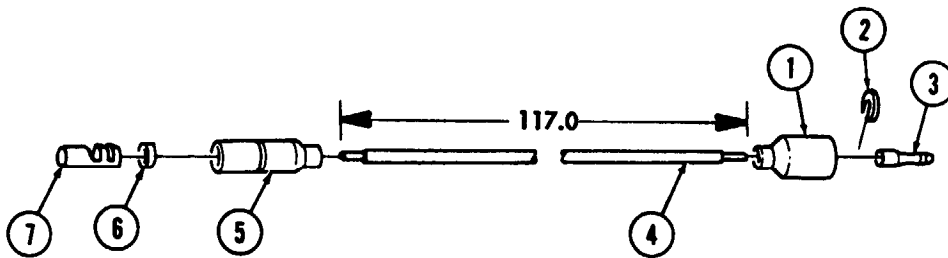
Wire "G" - Passenger Side Siren Switch Adapter Connector "E"
